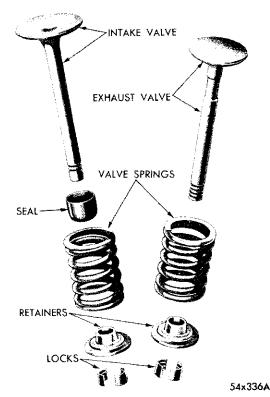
Valves, Springs, Seals, Retainers and Locks (Disassembled View)
